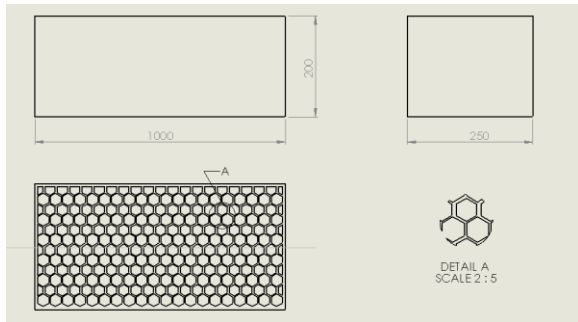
Drafting of hexagonal cross-sectioned impact barrier
